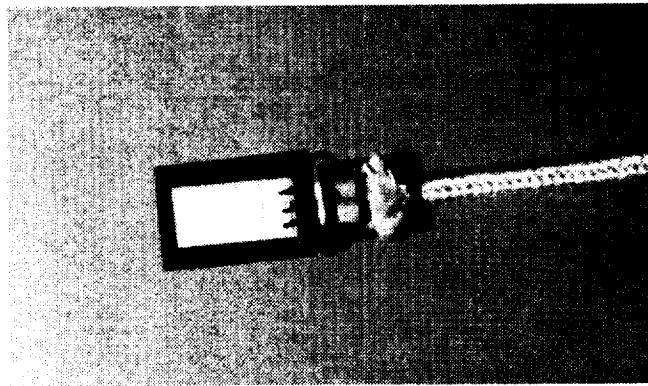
Photograph of PdCr weldable gage with terminal and cable.
